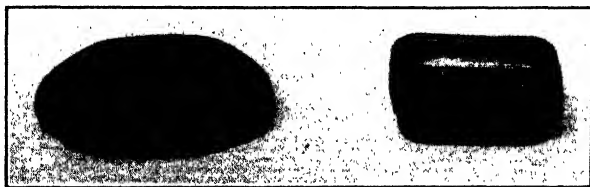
A drawn sardine box, which is not trimmed, and the developed blank for it.
